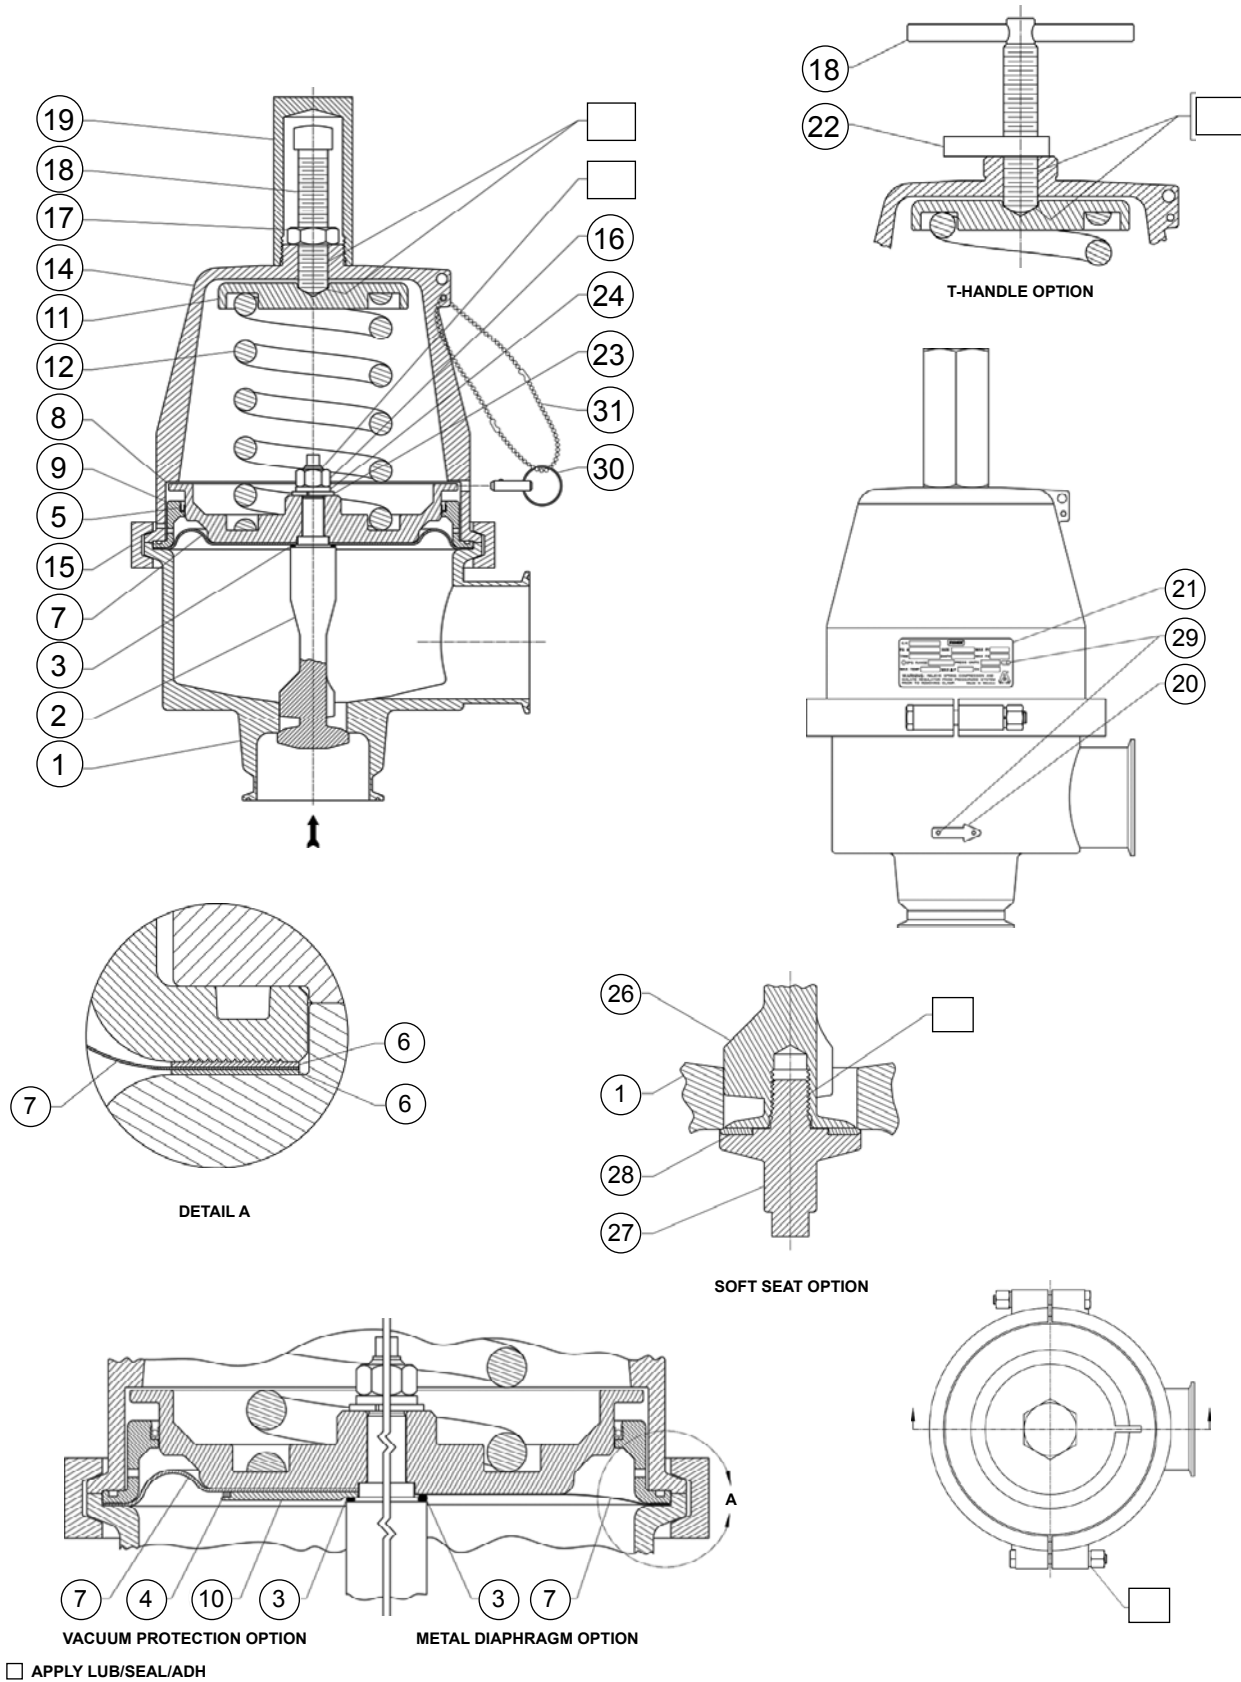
Type SR5 Sanitary Regulator Assembly with Pressure Loaded Spring Case
